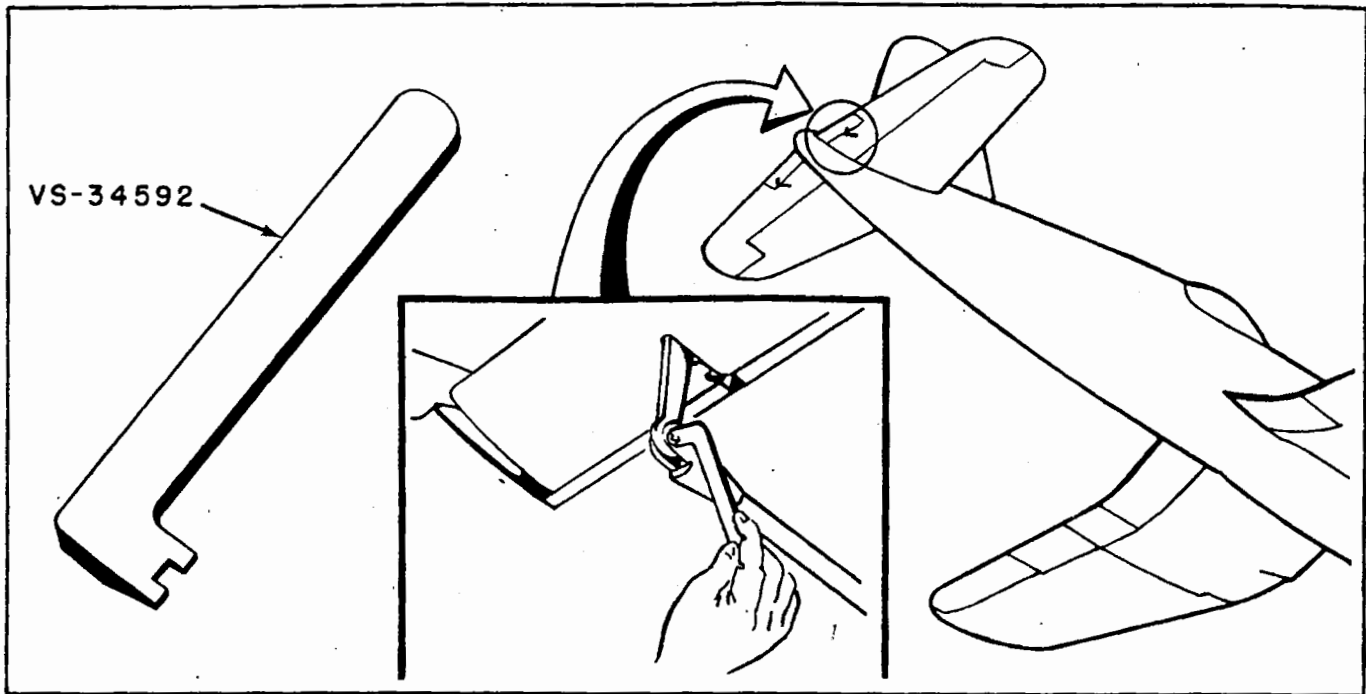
Slotted Screwdriver — Used for Removal of Screw on Elevator Tab Control Rod.
